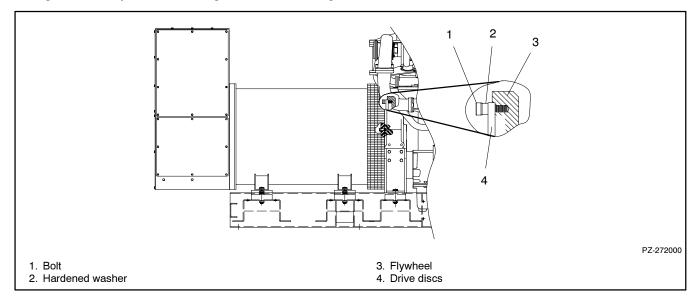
Generator Set Component Reassembly (450–1000 kW Model Shown)
